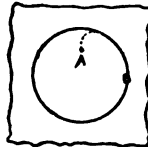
Shows point of start (A) when cutting circular hole in plate.
